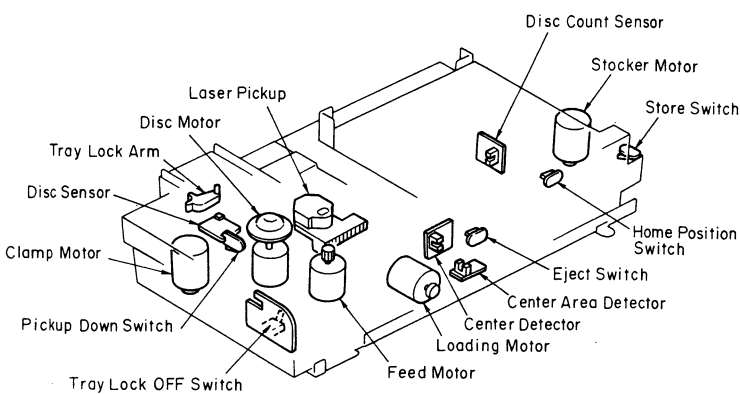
Electrical Parts Location in the Mechanism Ass'y
